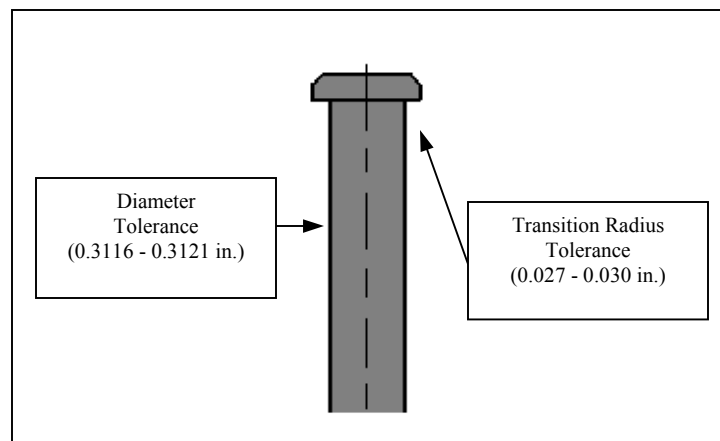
Dimensional tolerances for headed cylindrical blank
